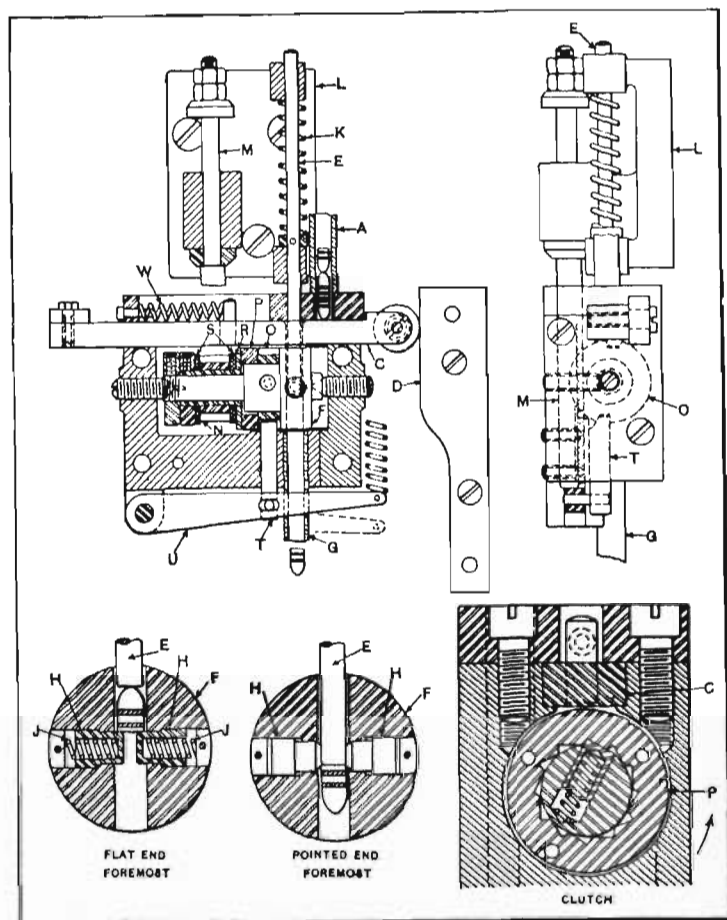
Attachment for Hopper Feeding Mechanism Which Delivers All Bullets to a Dial Feed Plate with Pointed Ends Foremost
